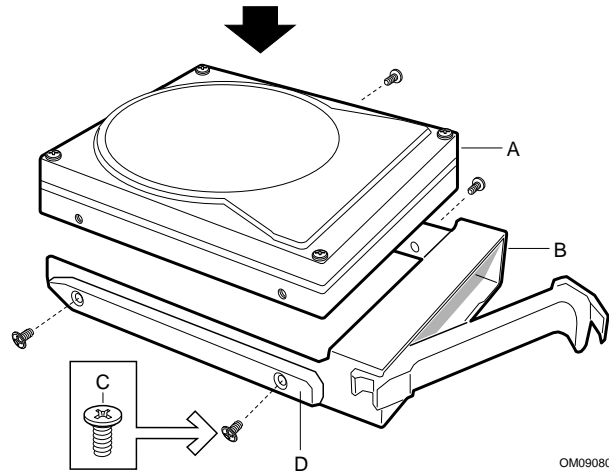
SCA Hard Disk Drive and Hot Swap Drive Carrier
